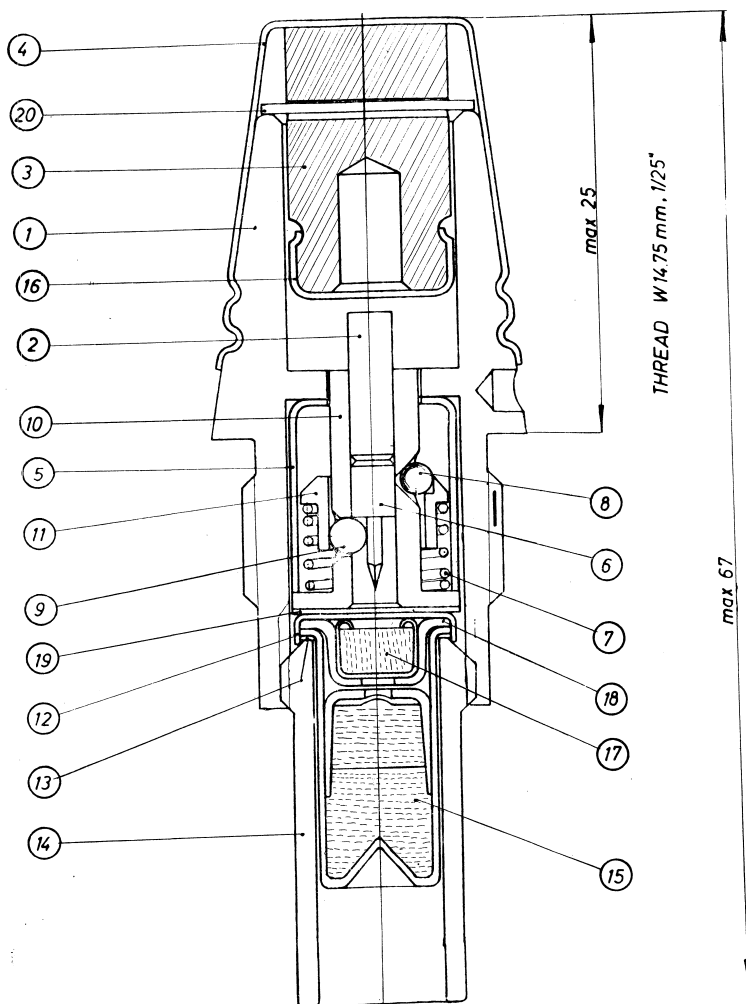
FUZE PD DESIGNED FOR HIGH EXPLOSIVE ANTI-TANK SHELL „HEAT“
